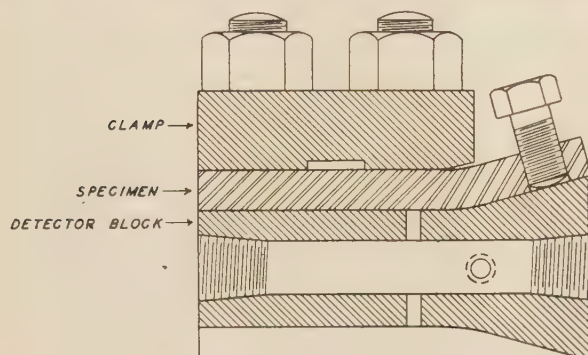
CROSS SECTION OF DETECTOR ASSEMBLY
